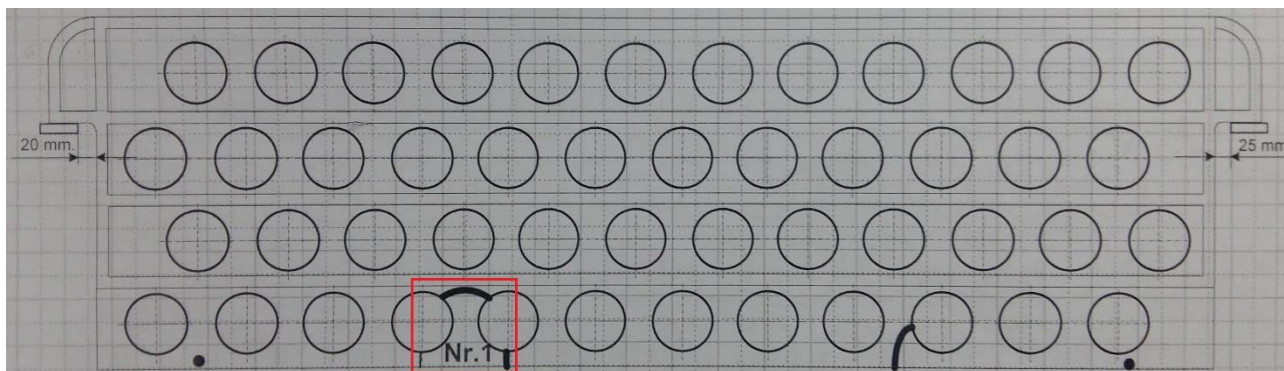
The scheme of the tubes sheet of the coil tube in the furnace with cracks No. 1
